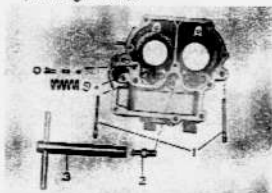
Removing Slow Jets and Power Valve 01908
